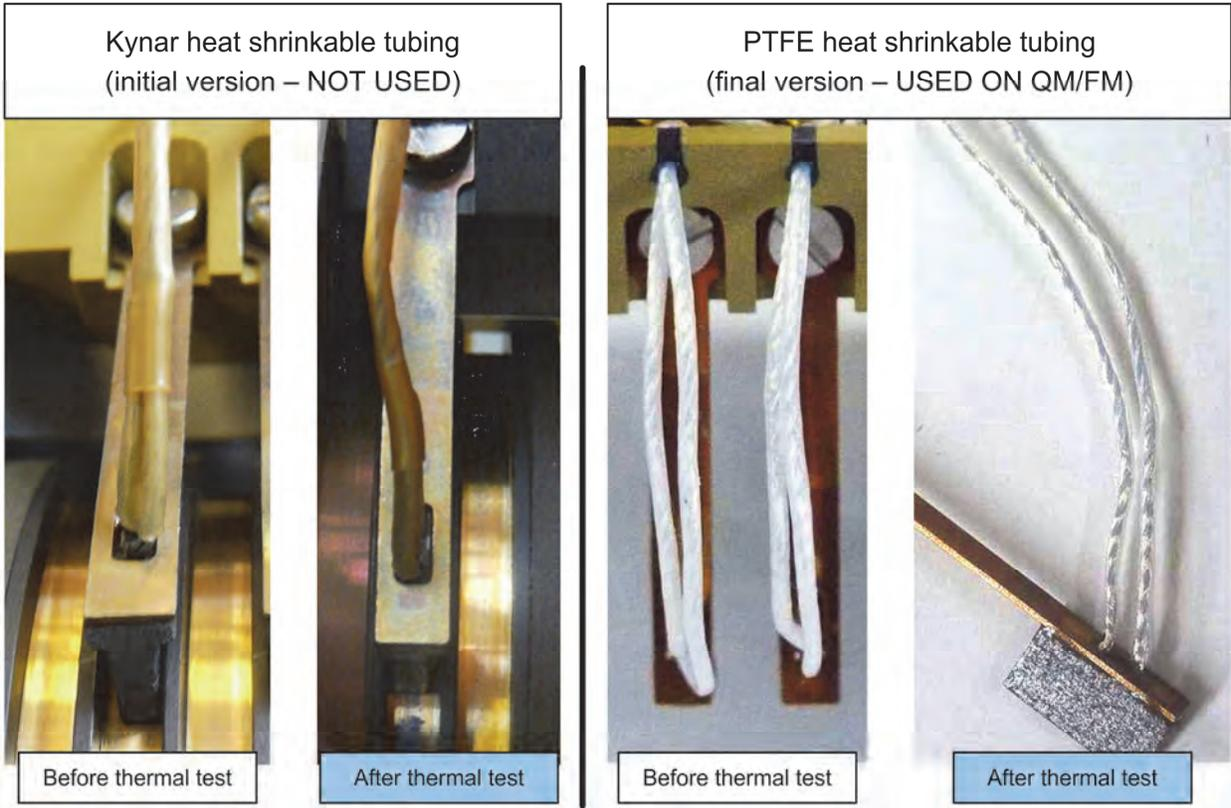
Change of heat shrink sleeve type (left: old, right: new)
